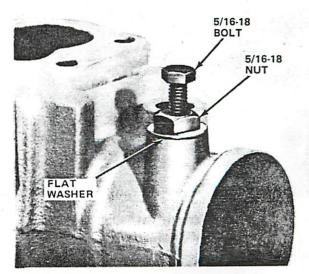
L-21 Hose Connector Seat Removal (Gears with Non-Metric Fittings Only)
